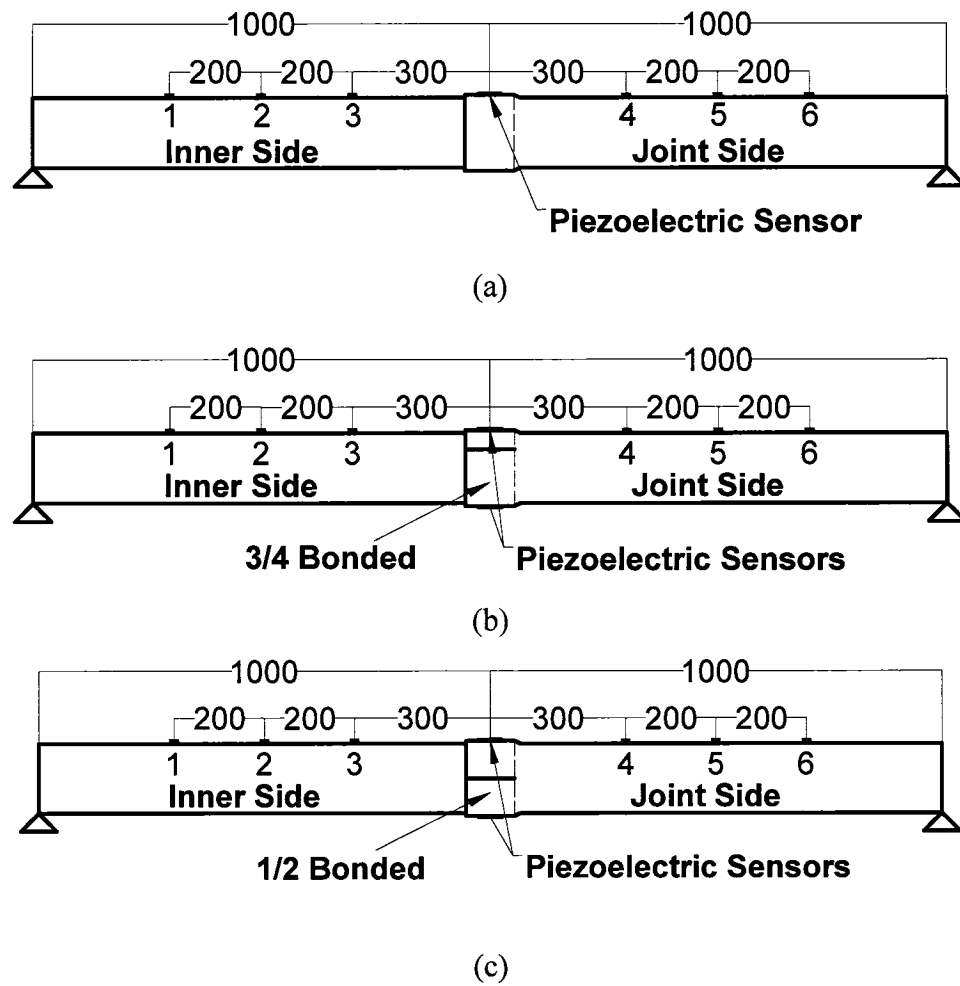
Experimental Test Set-up for Adhesively Bonded Pipe Joints (a) Fully Bonded Joint, (b)  $\frac{3}{4}$ -Bonded Joint, (c)  $\frac{1}{2}$ -Bonded Joint
